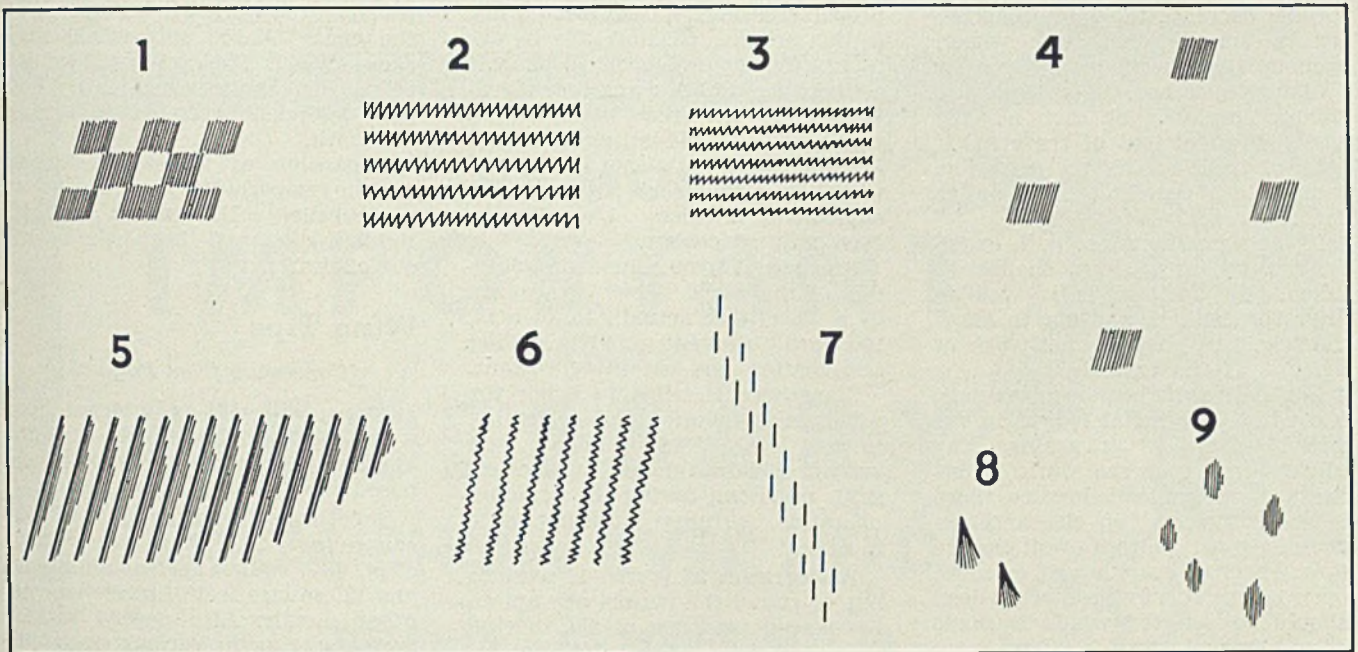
"Checker board" blemish, caused by wheel out-of-balance or out-of-round
